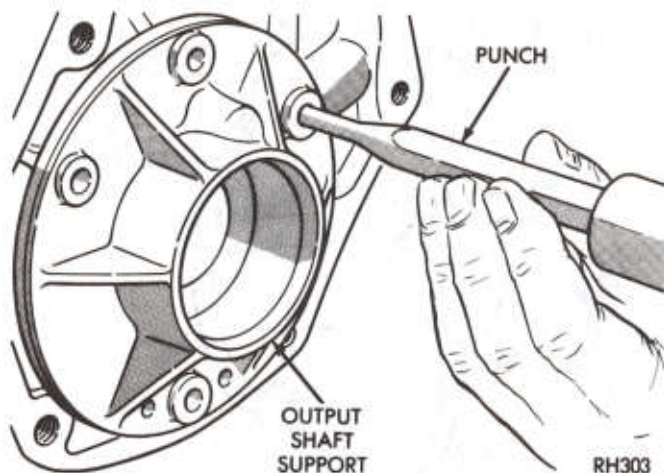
Remove Overrunning Clutch Cam (A-727)
